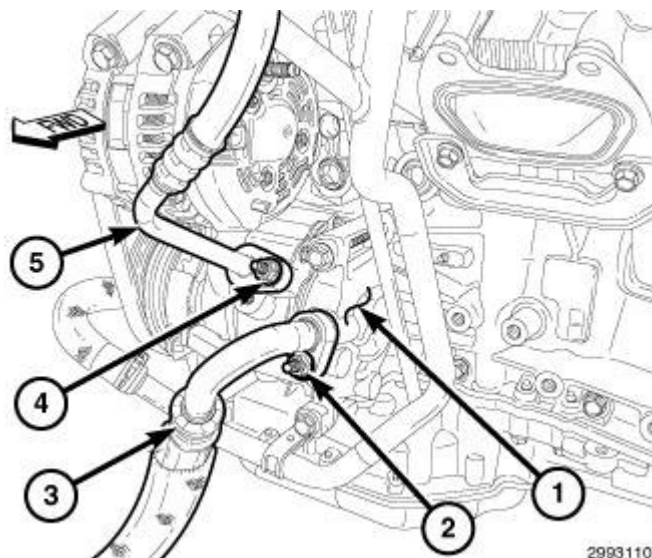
Nuts, A/C Suction Line, A/C Discharge Line & A/C Compressor
